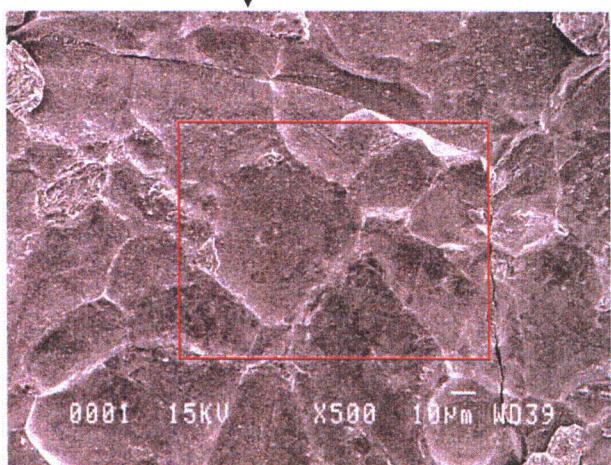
Appearance of fracture surface of TP C-1 and C-2 sample C
